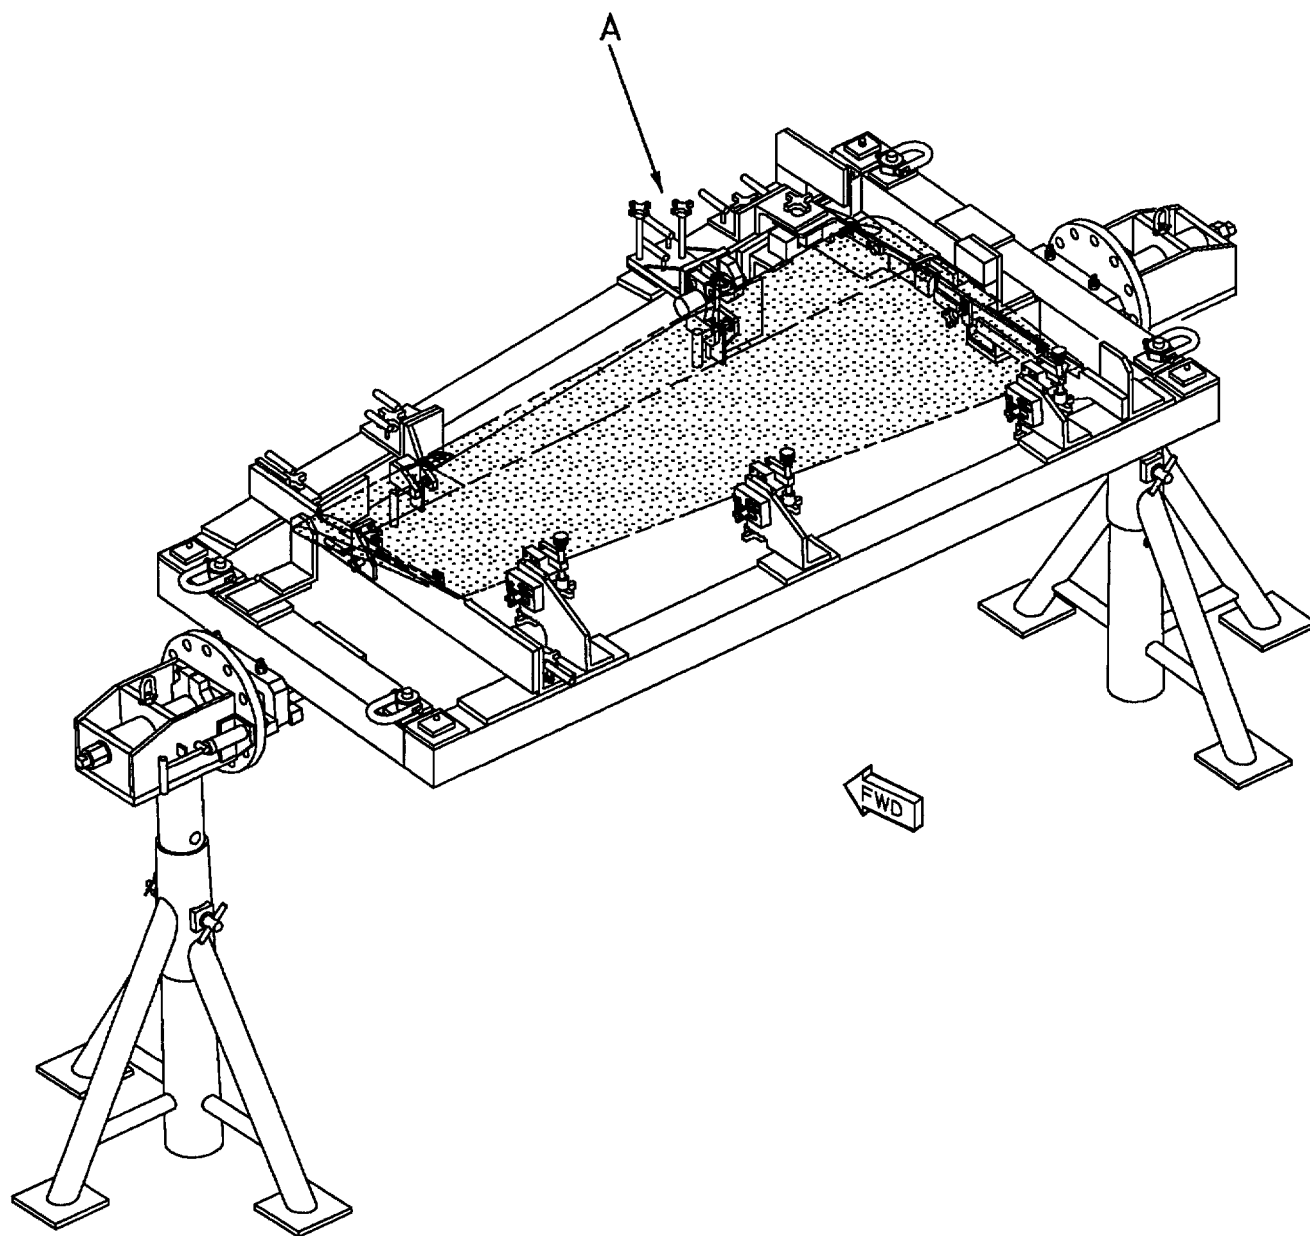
Bushing Replacement at 74A170604 Rib Assembly (Sheet 1)
